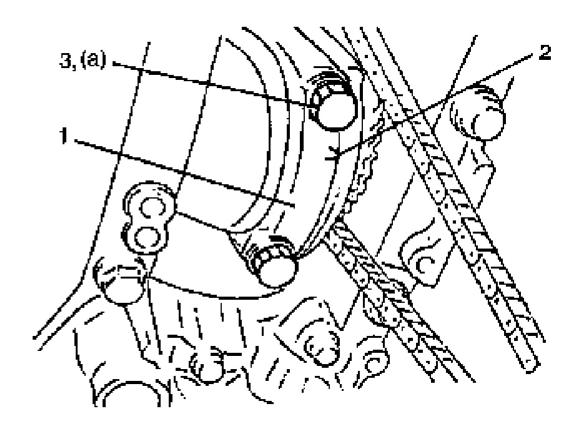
Identifying Mark On Cap To Crankshaft Pulley Side Courtesy of SUZUKI OF AMERICA CORP.
